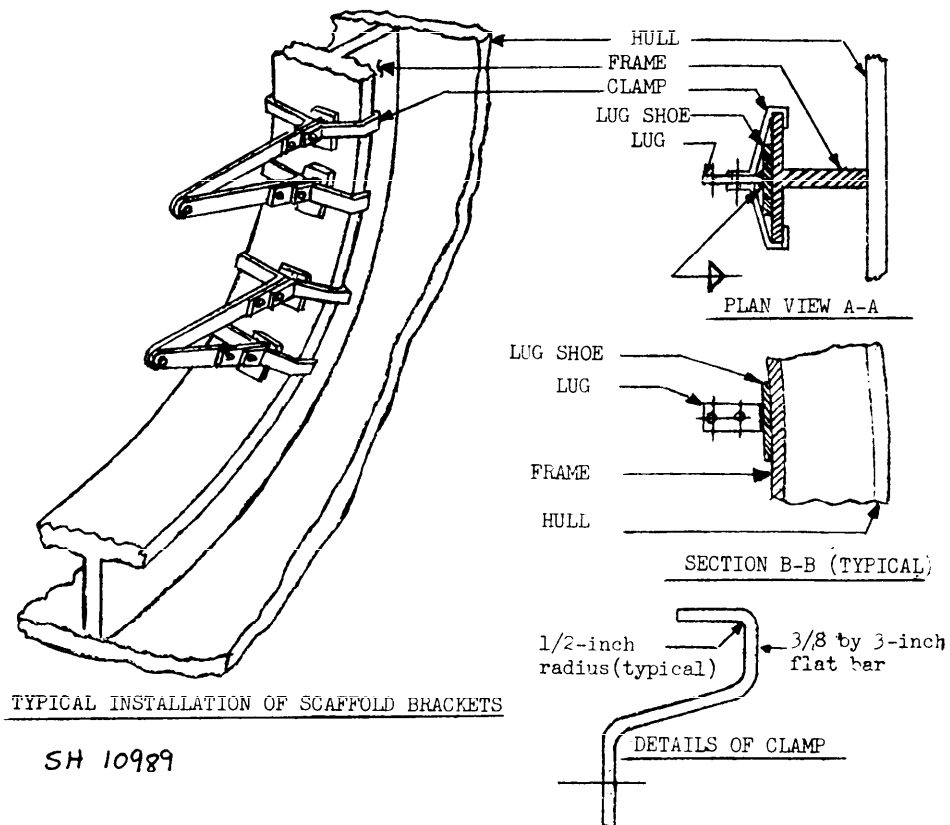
Non-welded type scaffold or staging attachment arrangement.
